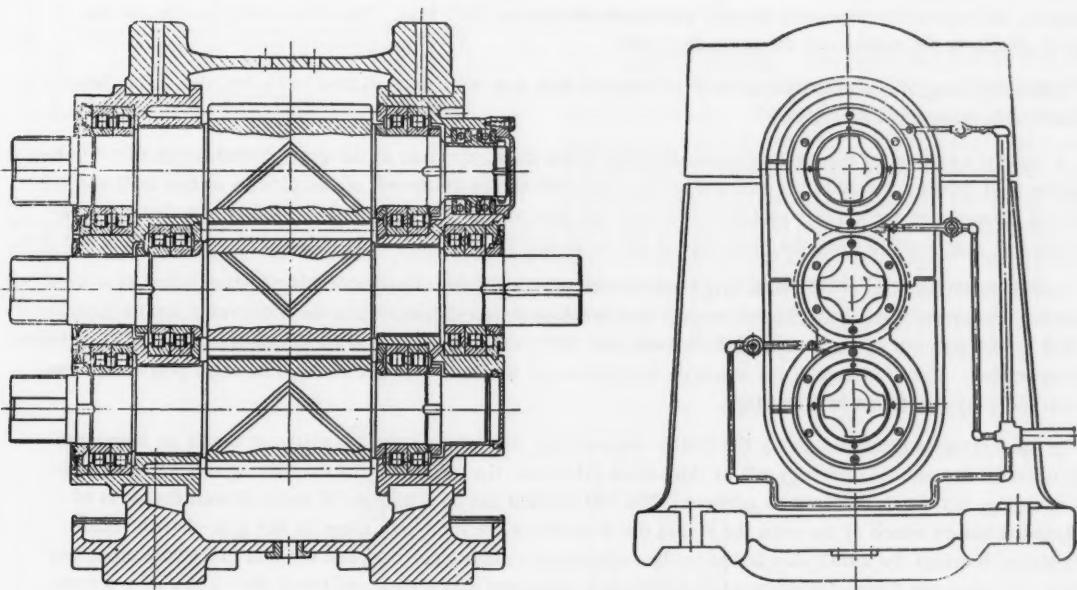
Gear-driven stand of 300 merchant-section mill.
